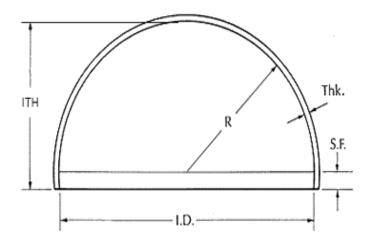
HEMISPHERICAL HEAD DIMENSIONS
